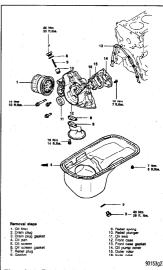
Exploded view of the oil pump mounting—1.5L engine
